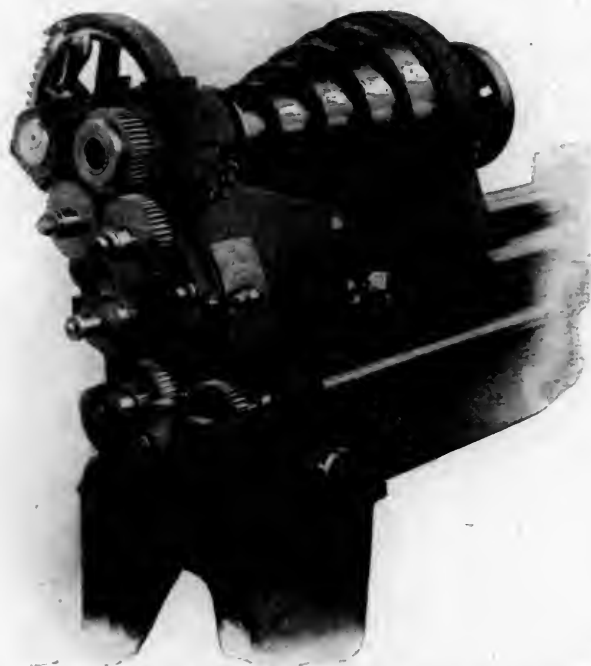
VIEW OF THE HEADSTOCK END OF THE LODGE & SHIPLEY LATHE, SHOWING ARRANGEMENT OF THE VARIABLE-SPEED FEEDING MECHANISMS.
